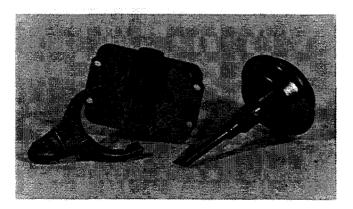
1021-10 Shift motor may now be pulled free from the shift fork and housing cover.
